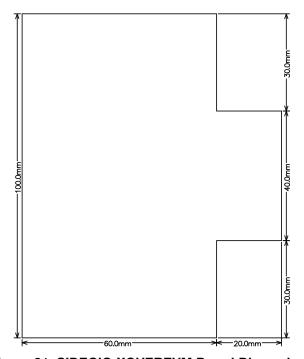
SIDEGIG-XOVEREVM Board Dimensions
